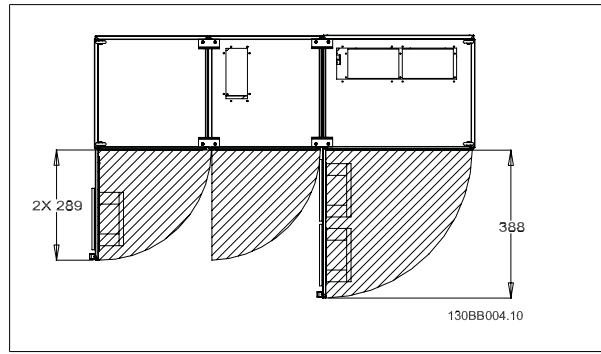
Space in front of IP21/IP54 enclosure type, frame size F3.
